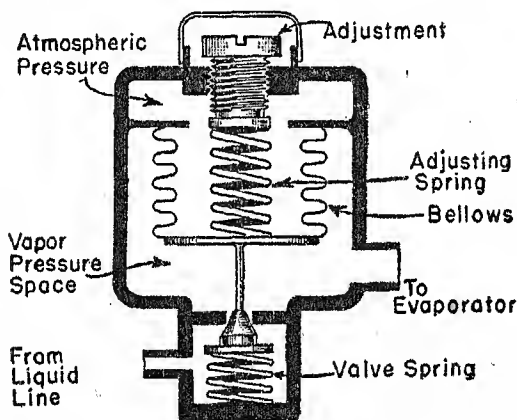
Adjustment Principle of an Automatic Expansion Valve.
